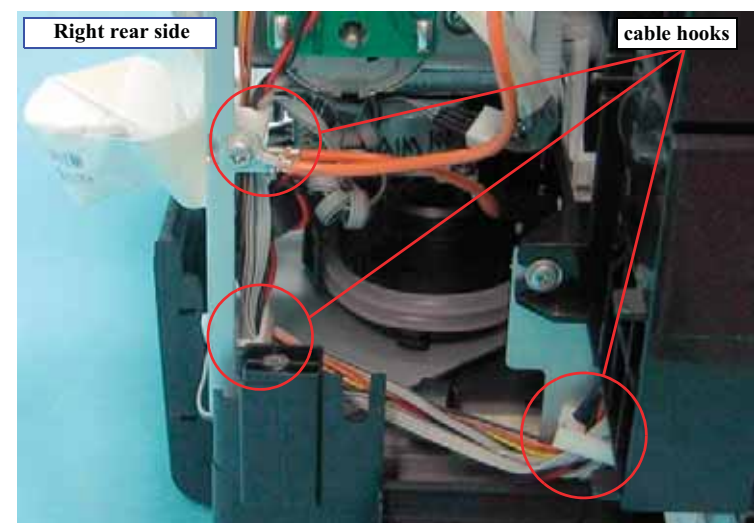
Releasing the PAPER, DETECTOR, ASSY. Cables
